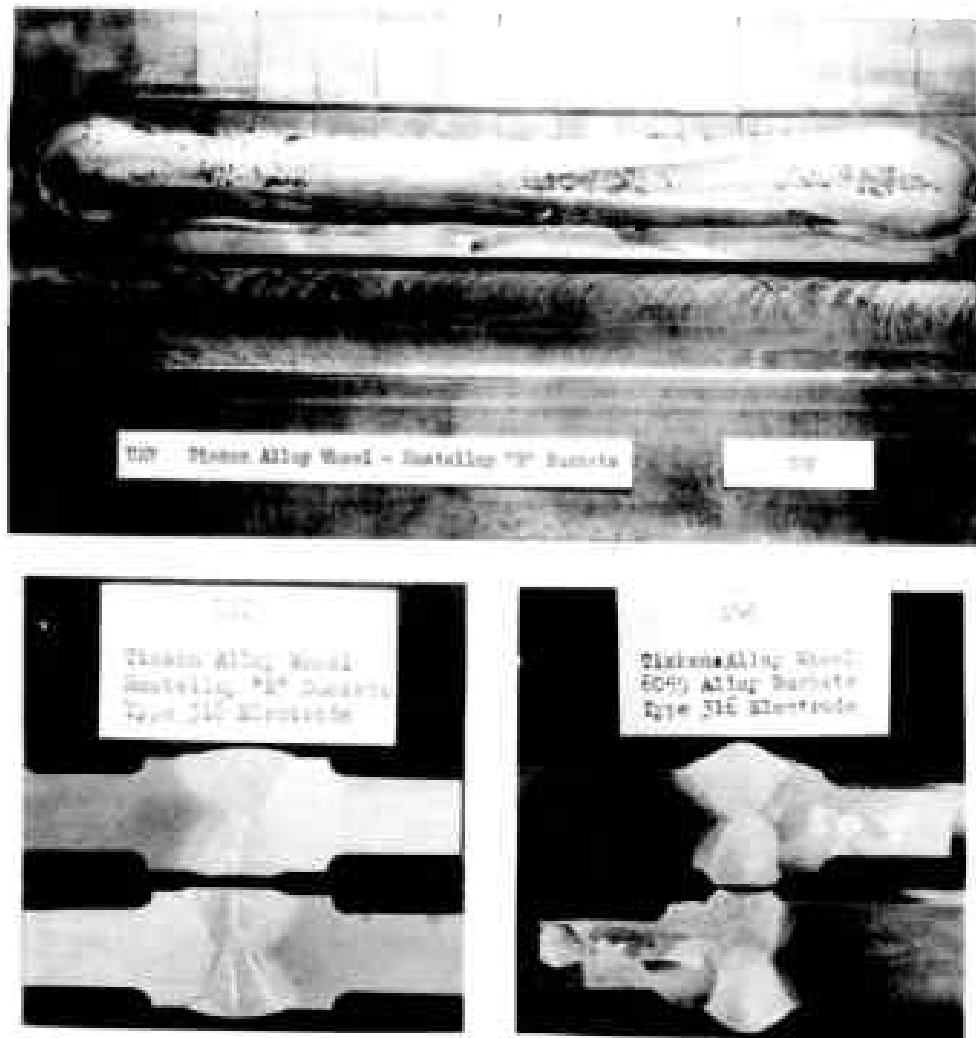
Typical Wheel-and-Bucket Design Test Specimens Welded by the Submerged-Melt Process. Weld Beads are "Wide" Type Deposits. As Welded Plate above, Macro Etch Specimens below.
